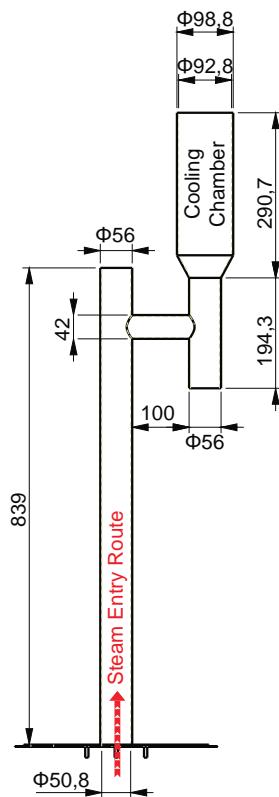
Technical Drawing of the Reflux Still (all dimensions are in mm).
